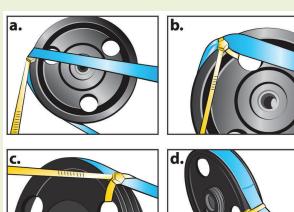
If a special installation tool is not available and the pulley has holes, then a tie wrap can be used to install a new stretch belt.
